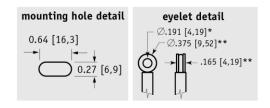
Outline Drawing (36 oz. cable tension only)
